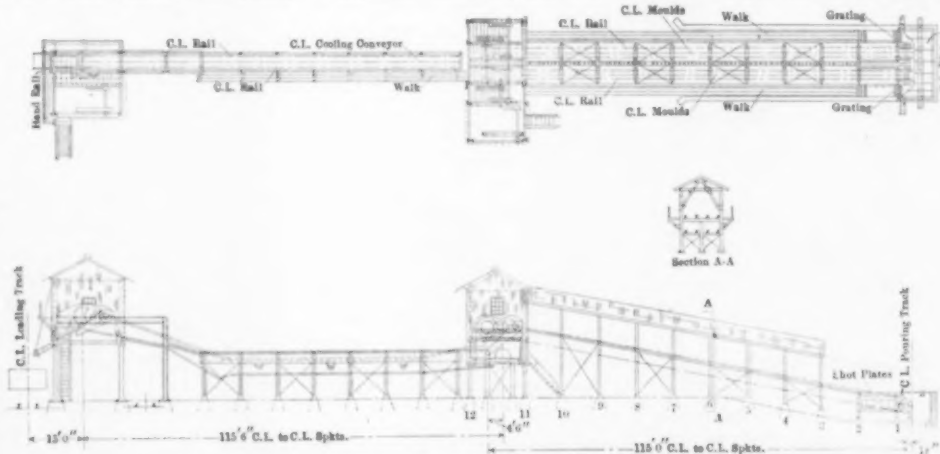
GENERAL ARRANGEMENT OF UEHLING CASTING MACHINE
